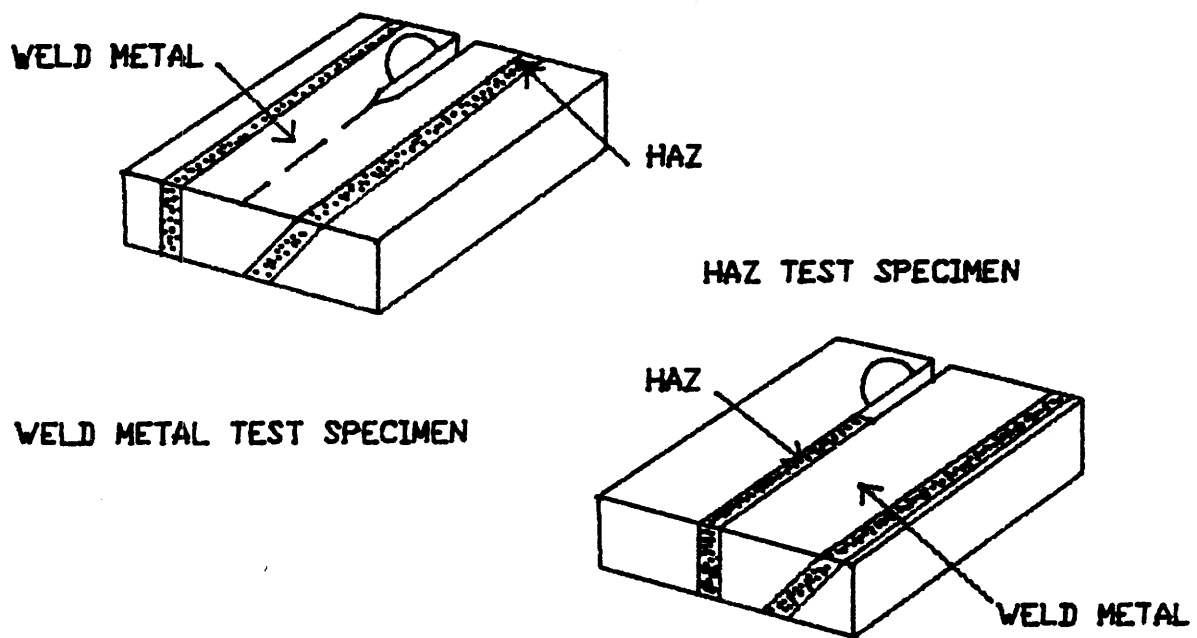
Orientation of WOL Specimens Removed from Weldments.
